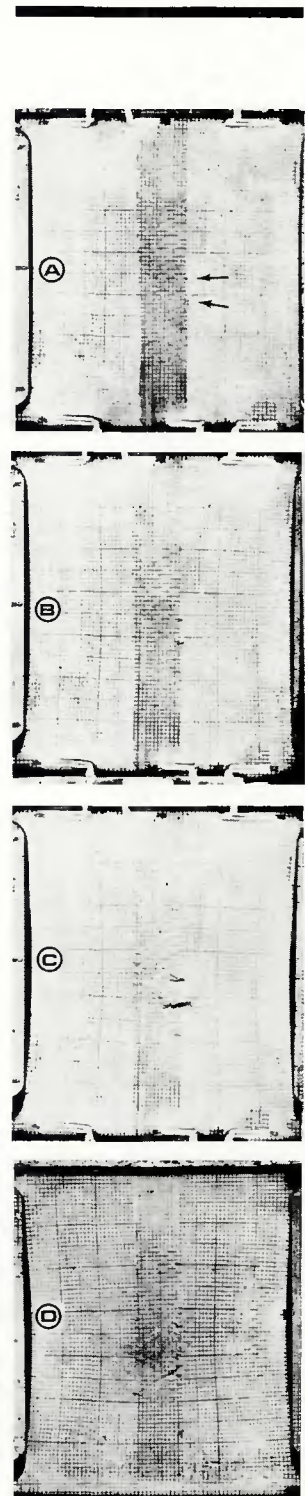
Photographs of high-ferrite square groove weld, 243: A—503 h, root face; B—1007 h, root face; C—1345 h, root face; D—1345 h, weld face
